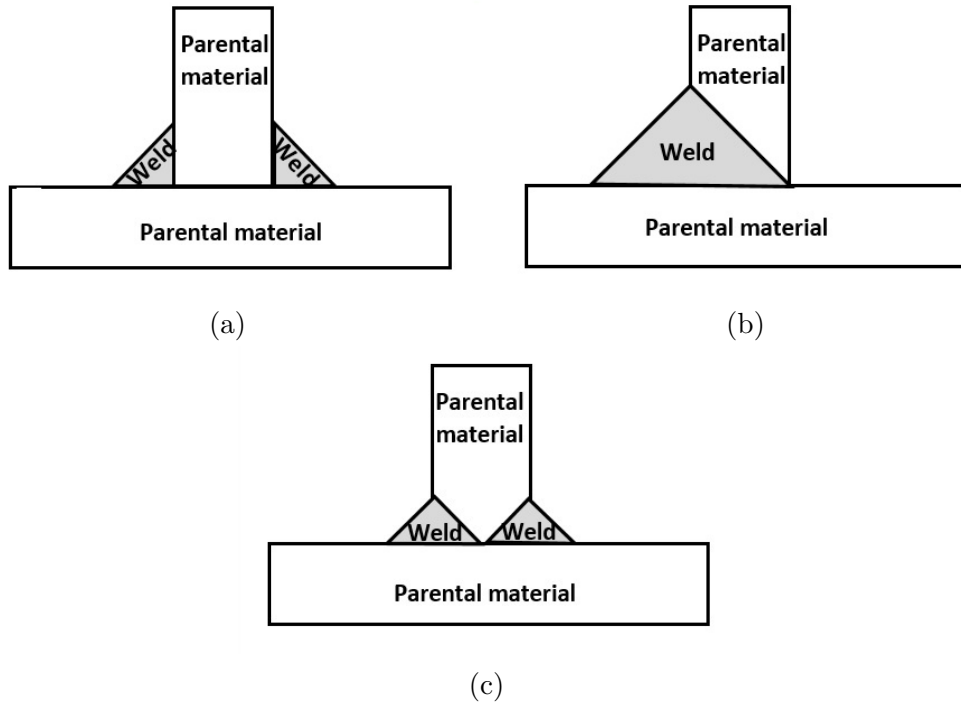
Illustration of the three types of welds:(a) The fillet weld; (b) The single penetration butt weld; (c) The double penetration butt weld.
